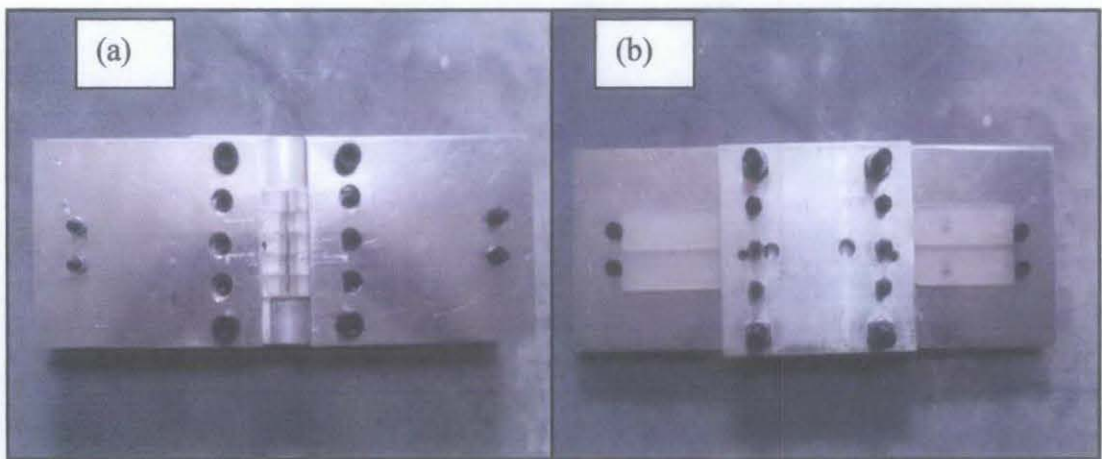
Jig with workpiece. (a) Top view. (b) Bottom view.
